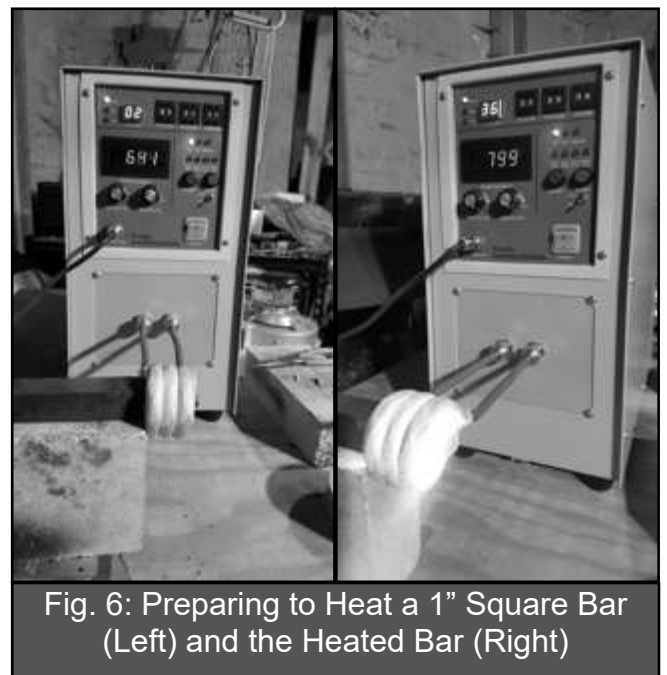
Preparing to Heat a 1" Square Bar (Left) and the Heated Bar (Right)
